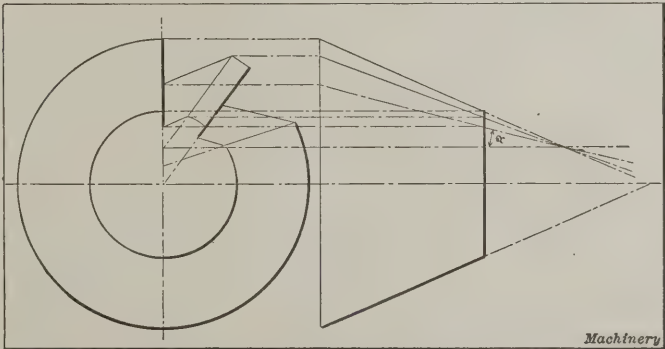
Diagrammatical Representation of Principles Involved in Milling Teeth in Angular Cutters
